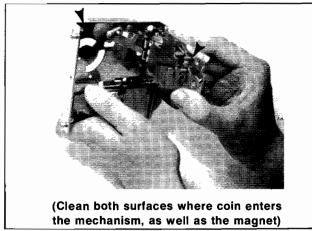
Surfaces to Clean Inside the Coin Mechanism
